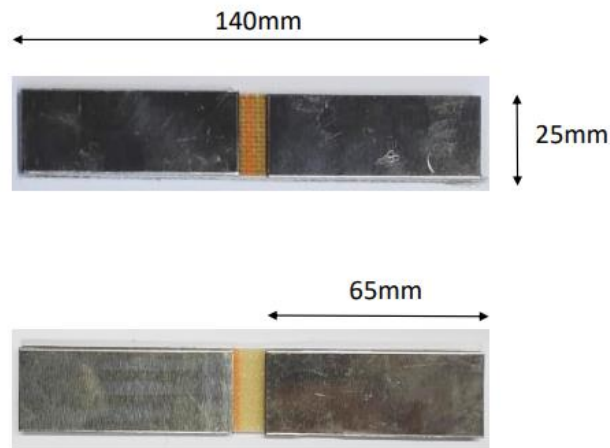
Kevlar and glass compressive samples with relative dimensions.
